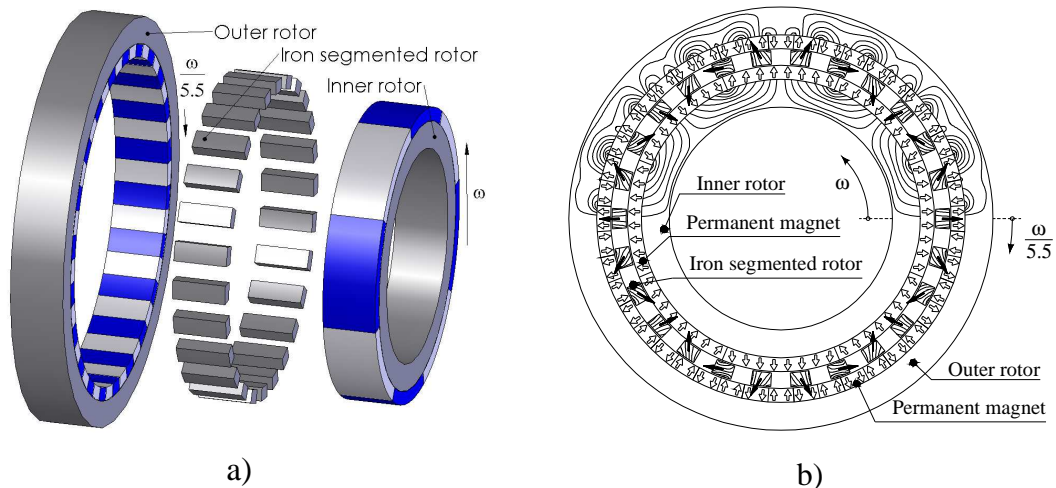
a) Exploded view of the magnetic planetary gear b) Cross section of a planetary magnetic gear.
